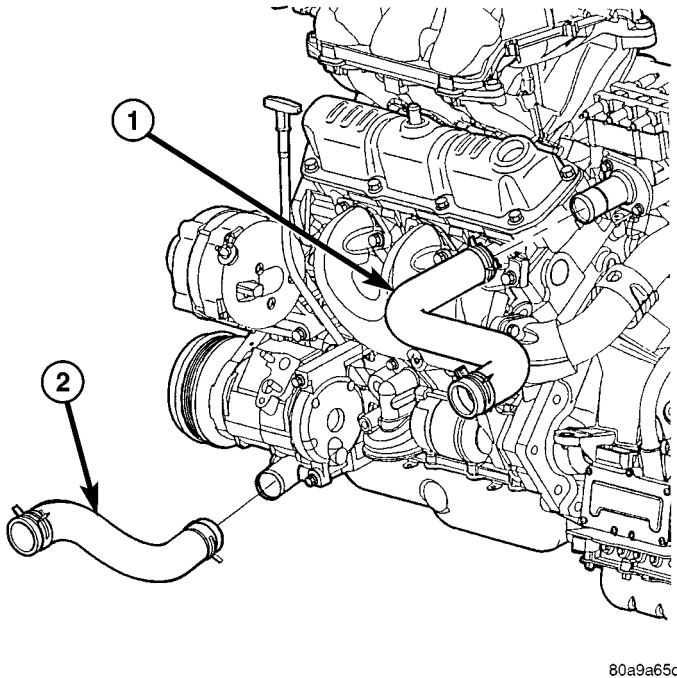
RAD HOSES TO ENGINE - 3.3/3.8L
